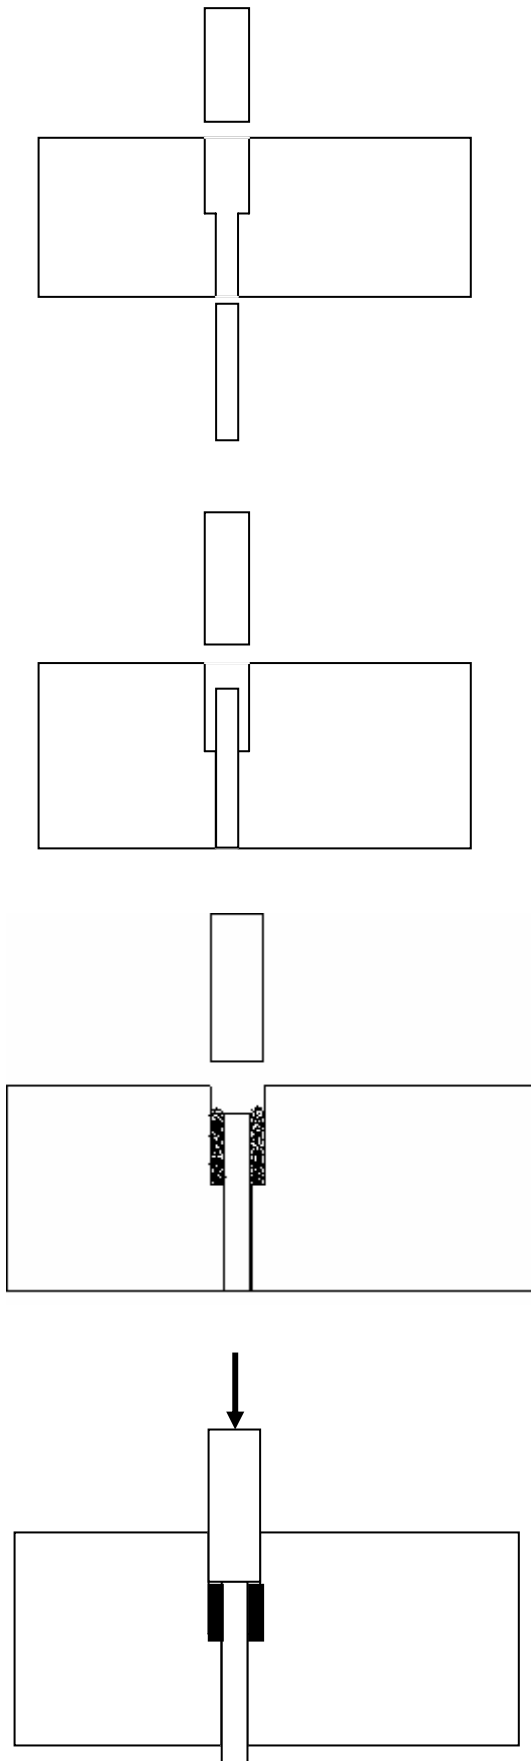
The drawings of the pressing apparatus used to pelletise the powder.
